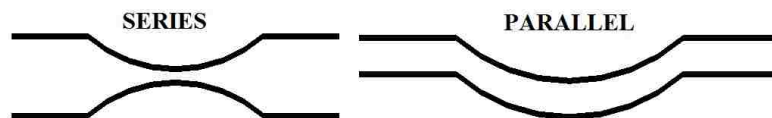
Types of bead profiles in gasket layers; Series (left) and Parallel (right)
